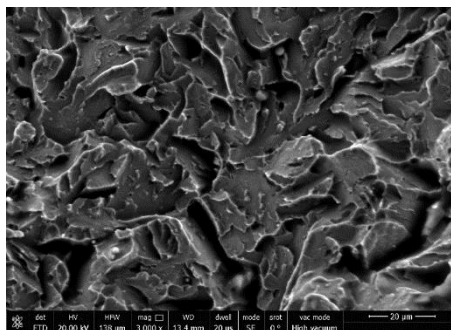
Fracture surface of impact specimen tested at - 35 °C
